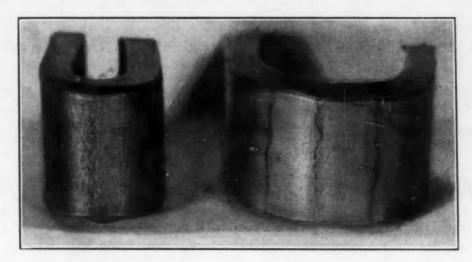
Photograph Illustrating the Condition of the Weld and Adjacent Areas After the Free Bend Tests on the Welded 3.00 Per Cent Chromium Steel Samples.  $\times$  1.
